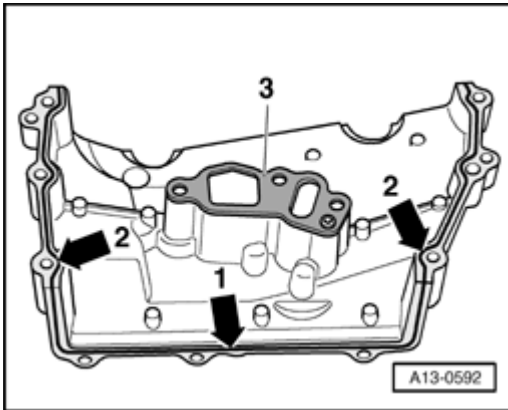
Applying Sealant Bead On Clean Sealing Surfaces Of Left Cover For Timing Chain
